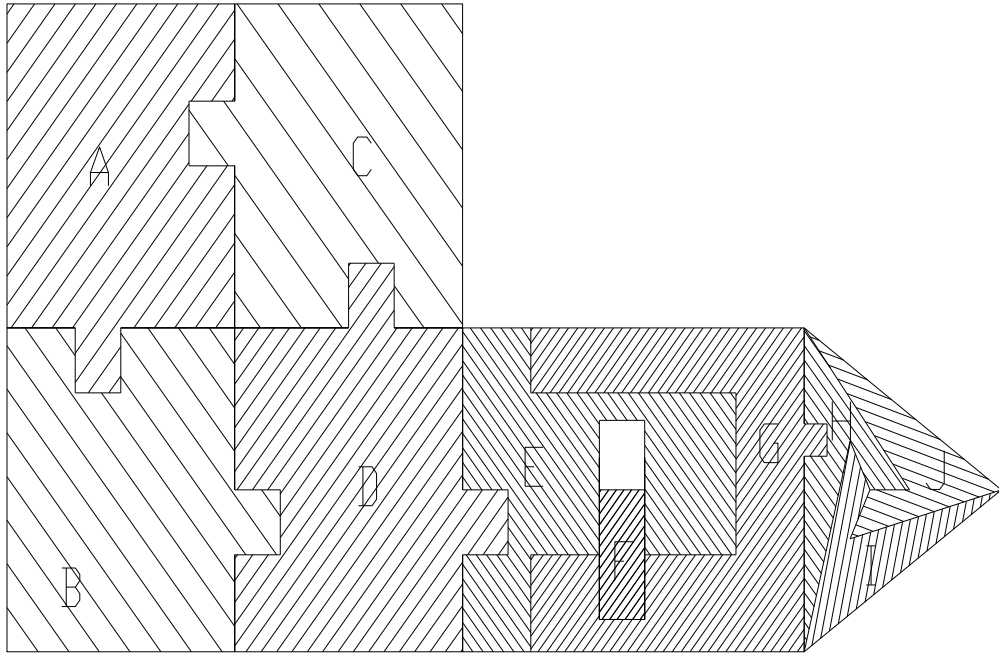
A product that can be assembled with a C-NS-NL-NM assembly
